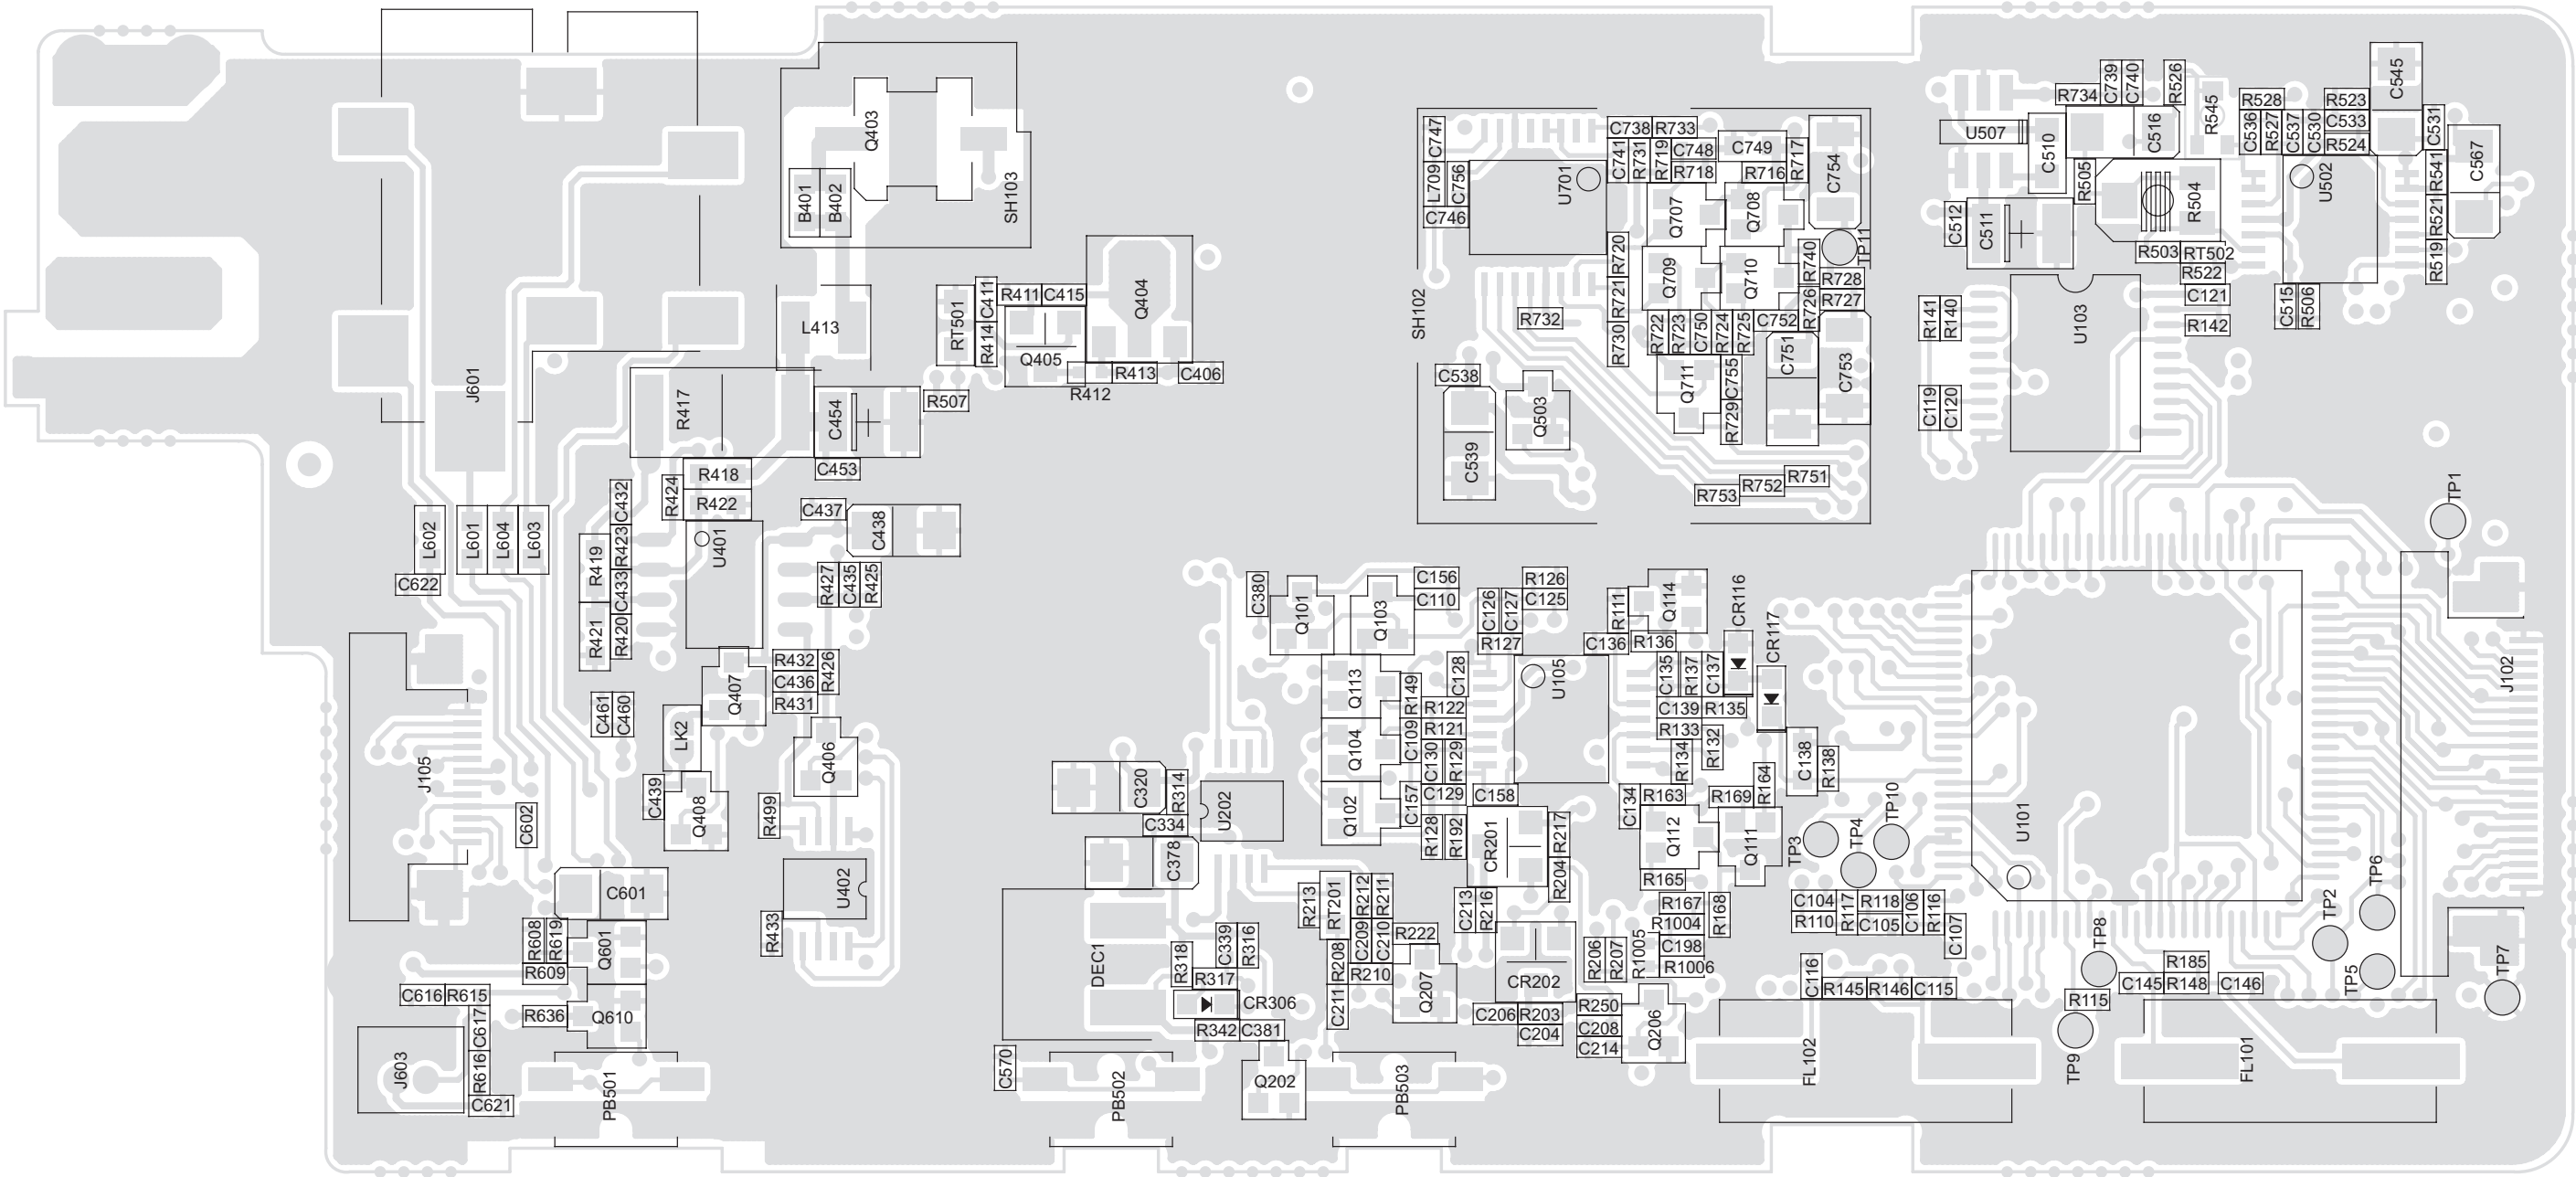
VHF (136–174 MHz) Mainboard Top Side: PCB No. E11-0762-0
